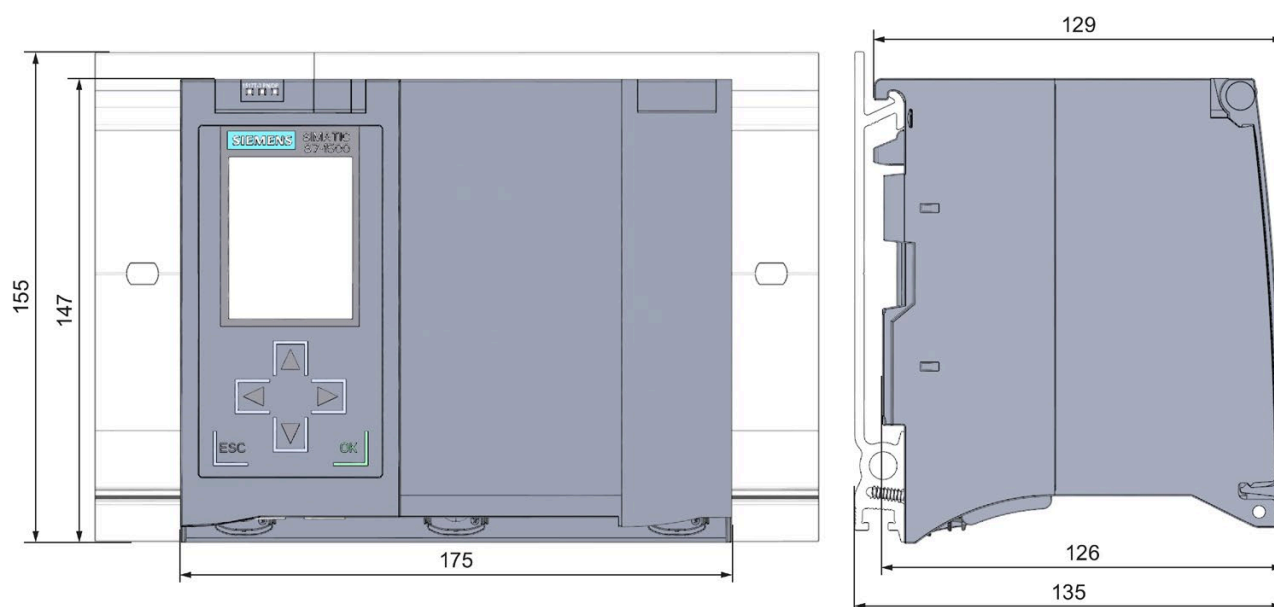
Dimensional drawing of the CPU 1516T-3 PN/DP, front and side view
